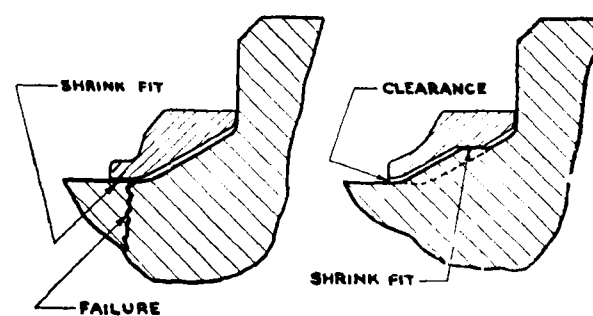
Left is shown failure of two-high mill roll that occurred when fretting corrosion produced pitting which nucleated a fatigue crack. Right is revised design changing position of shrink fit of location away from most highly stressed part of journal.
